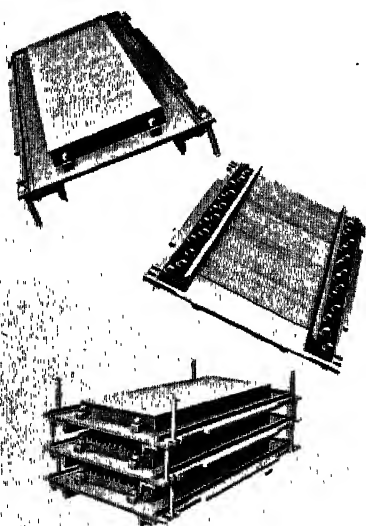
Construction of boxes for hydraulic press. (Courtesy *The French Oil Mill Machinery Co.*)
